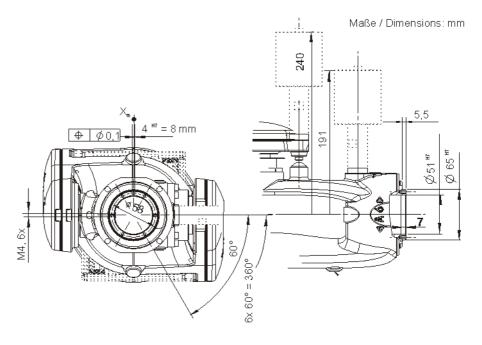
Mounting flange, KR 16 L8 arc HW
